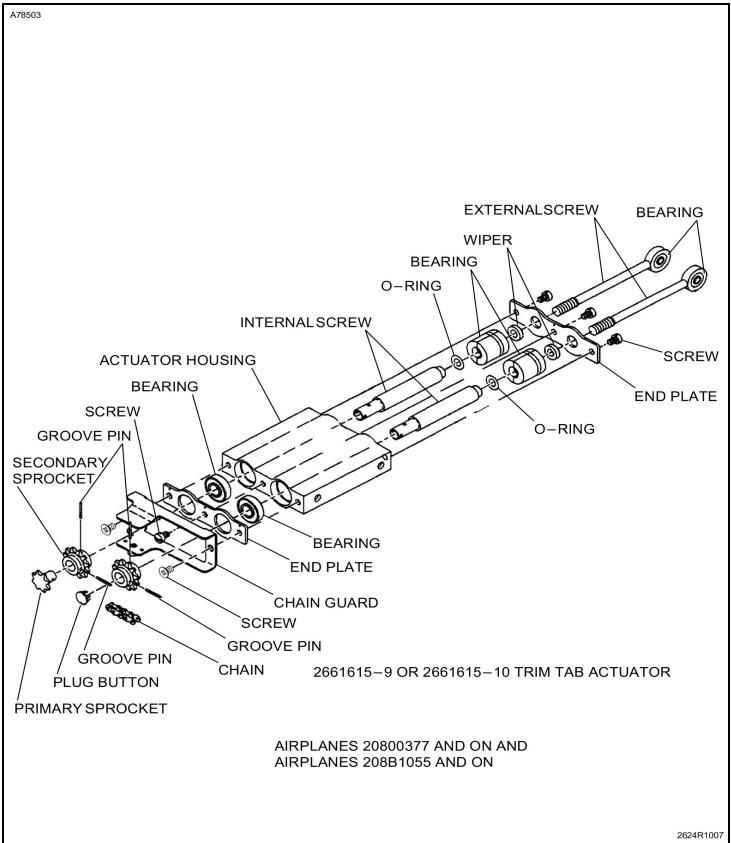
Sheet 7 : Aileron Trim Tab Actuator Disassembly/Assembly
